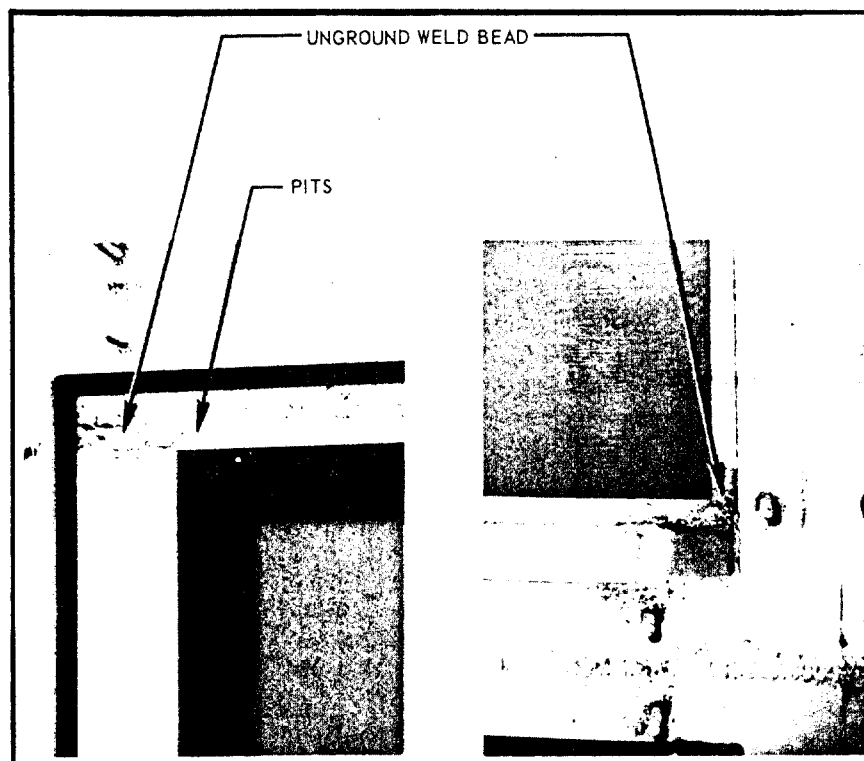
Unacceptable filter-seating surface on HEPA filter mounting frame. Note pits, unground weld bead, and weld spatter, all of which contribute to leakage of contaminated air due to inability to properly seat the filter.
